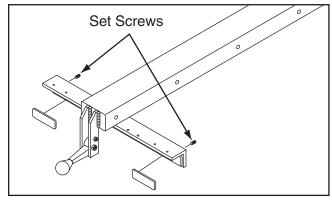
Location of set screws used to adjust fence parallelism and clamping pressure.
